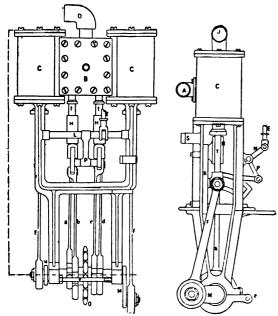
ENGINES OF STANLEY STEAM-CAR.
